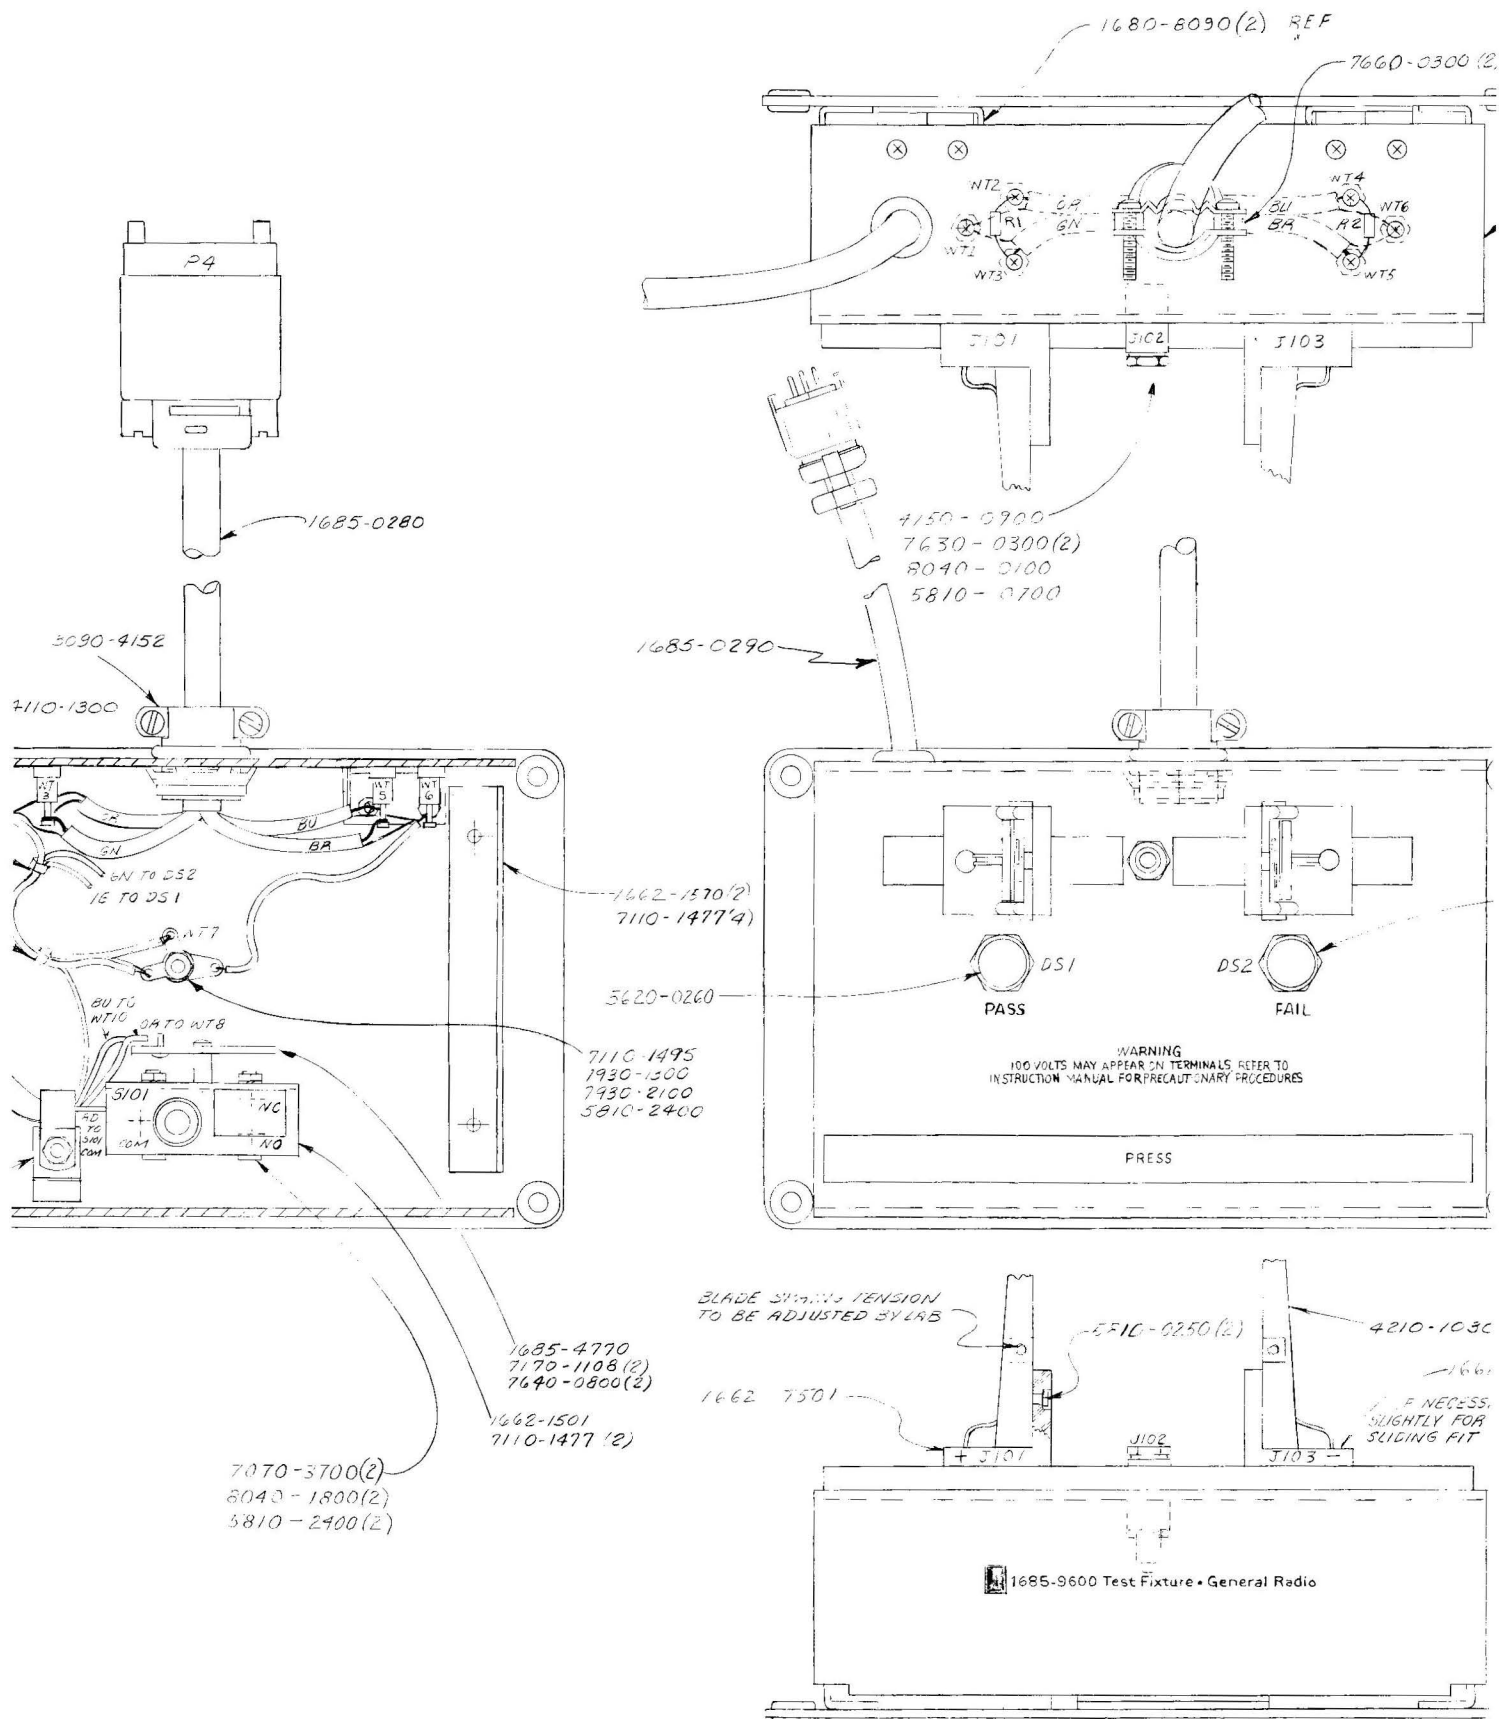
View of 1685-P1 Test Fixture, identifying parts.
